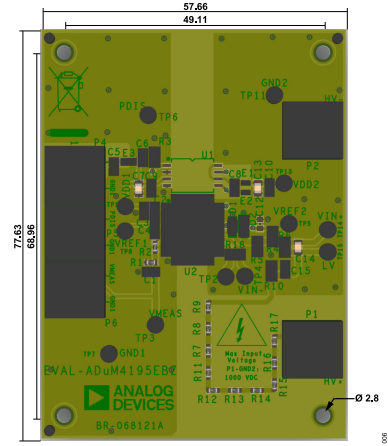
EVAL-ADuM4195EBZ Dimensions (mm)
